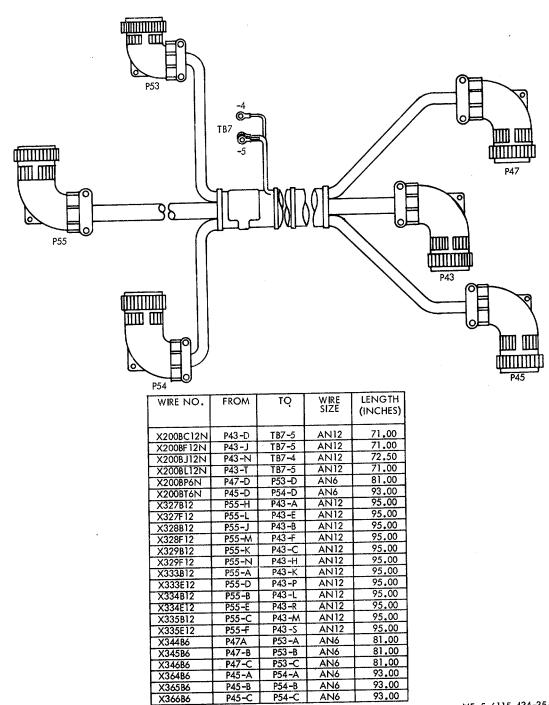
Compressor and exhaust fans wire harness assembly.
